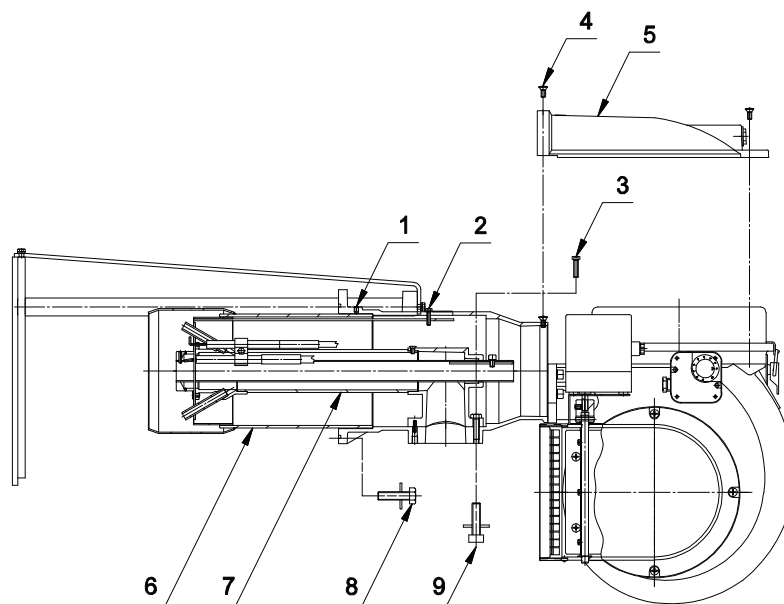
Extraction of the combustion head GAS XP80 - P130 - P160/MCE LX4
